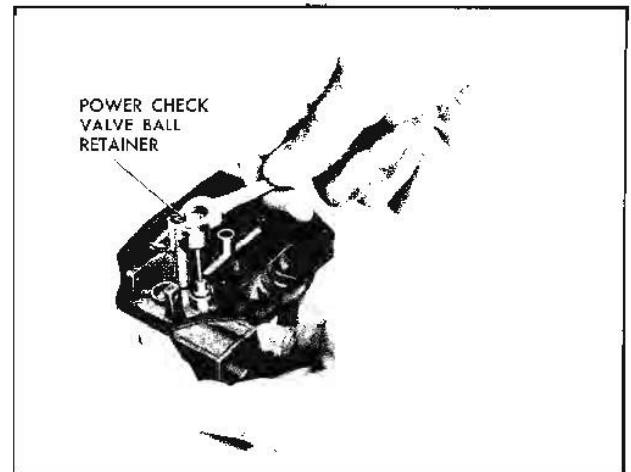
B-21 Removing Power Check Valve Ball Retainer
